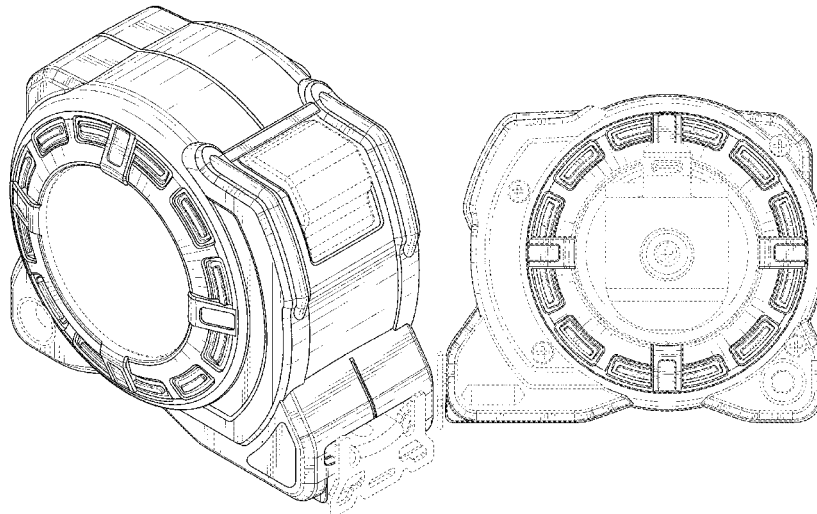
is a front view of the measuring tape device of FIG. 1;
